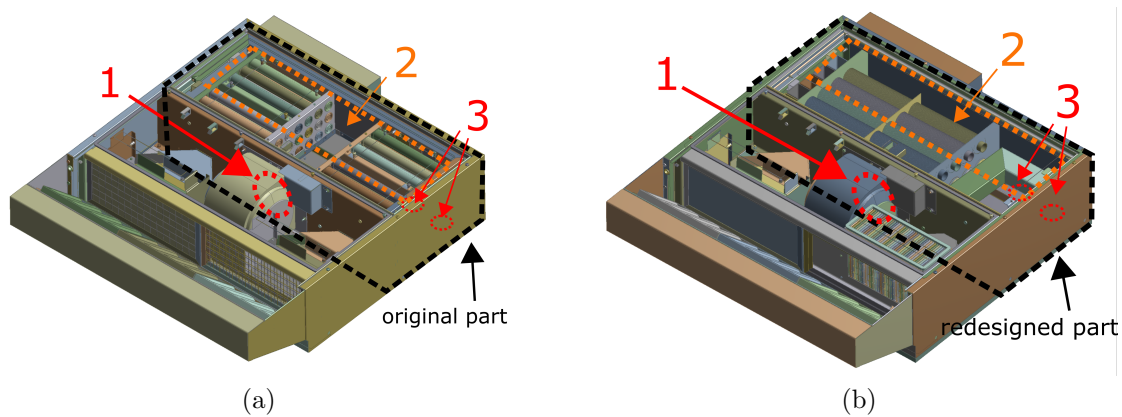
Condensation hood: a) original construction; b) redesigned construction; 1 - fan outlet (coolant air inlet); 2 - air outlet; 3 - steam vents. Figure adapted from images courtesy of Retech Ltd.
